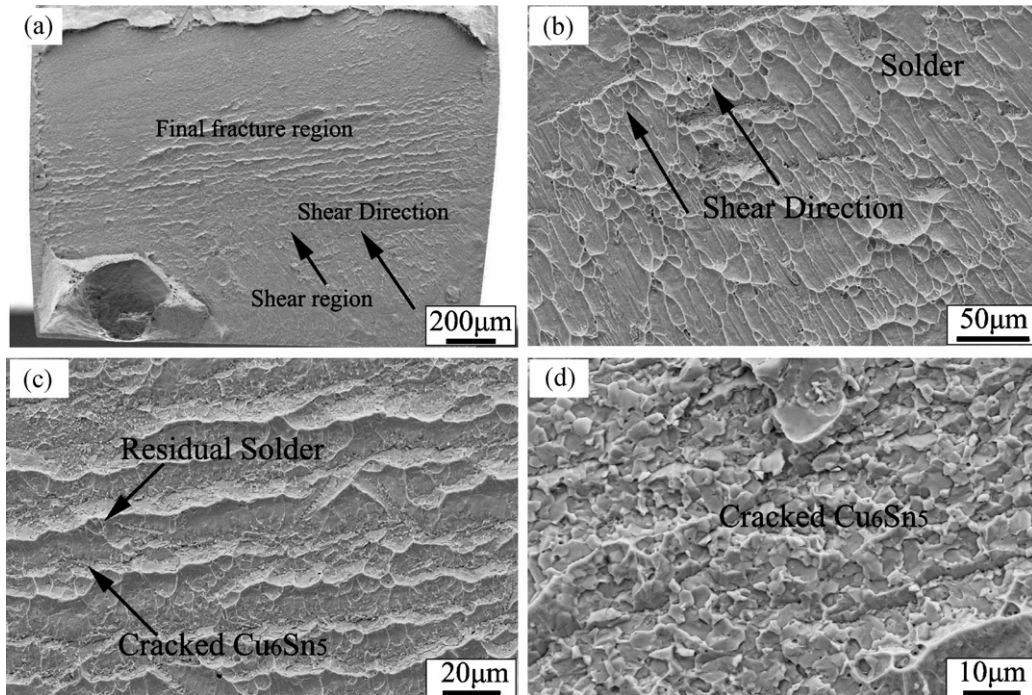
Fracture surfaces of solder joint aged for 4 h at the strain rate of $1.25 \times 10^{-4} \text{ s}^{-1}$: (a) macroscopic image; (b) fracture morphologies of shear region; (c) streaky structure and (d) inter-granular brittle fracture region.
